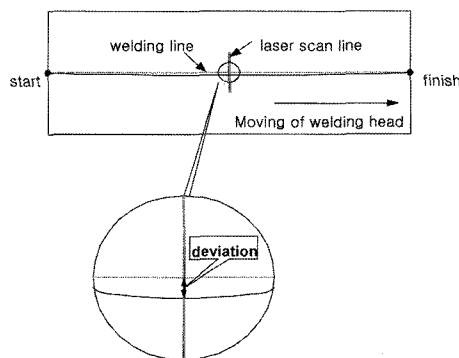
Error and deviation in a longitudinal weld line of a tube.
